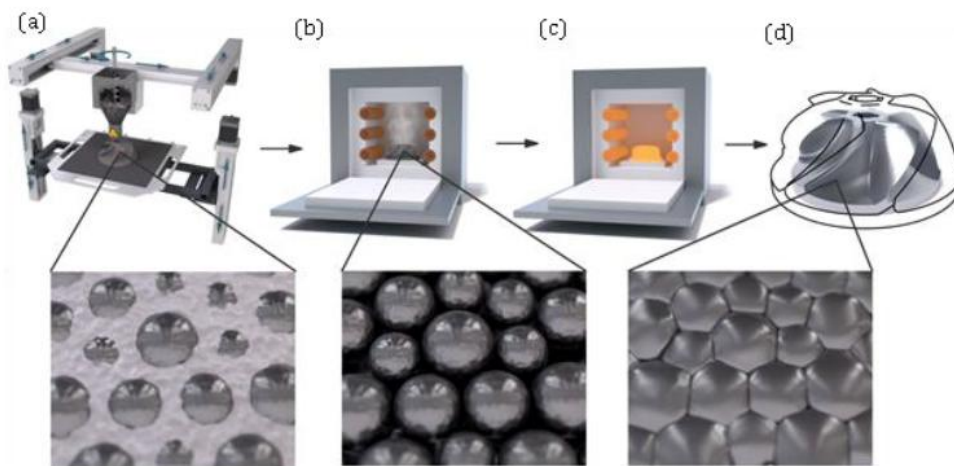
schematic of composite extrusion modeling process, a). 3D printing of green part, b) Debinding of green part in debinding furnace, c). Sintering of the resulting brown part in high temperature furnace, d). Final metal part. [4]
